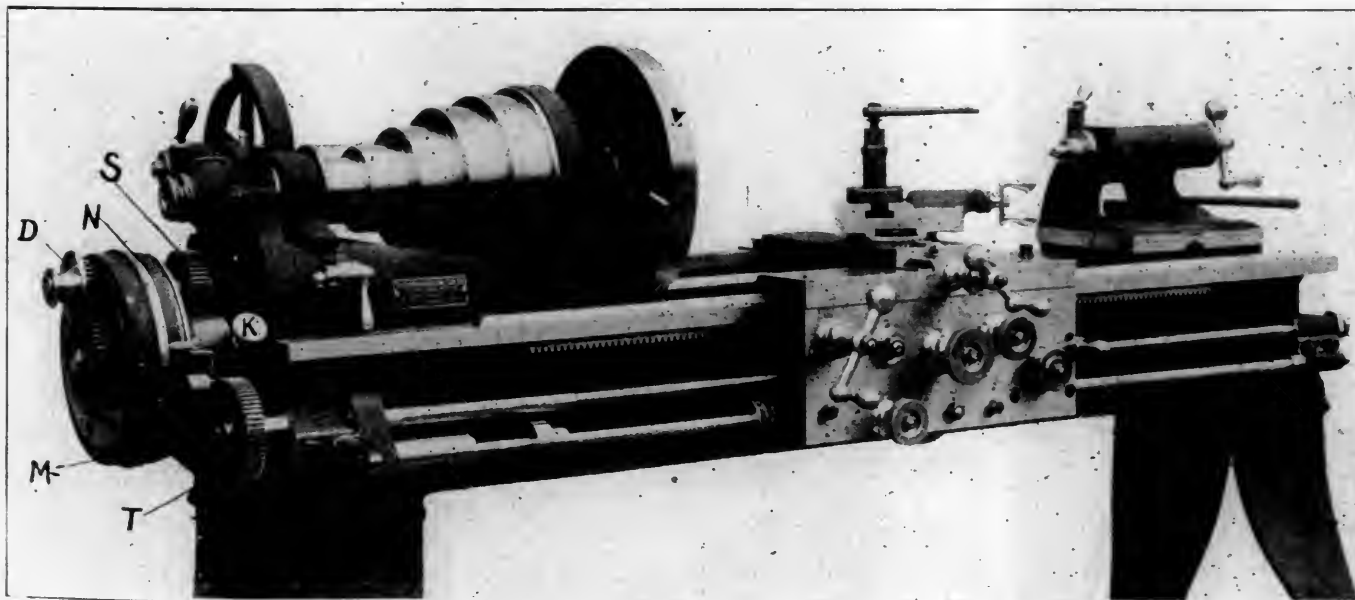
VIEW OF THE FEEDING ATTACHMENT MOUNTED UPON AN ENGINE LATHE OF THE BRADFORD MACHINE TOOL CO. MACHINE TOOL PROGRESS.—SCHELLENBACH FEEDING ATTACHMENT.
